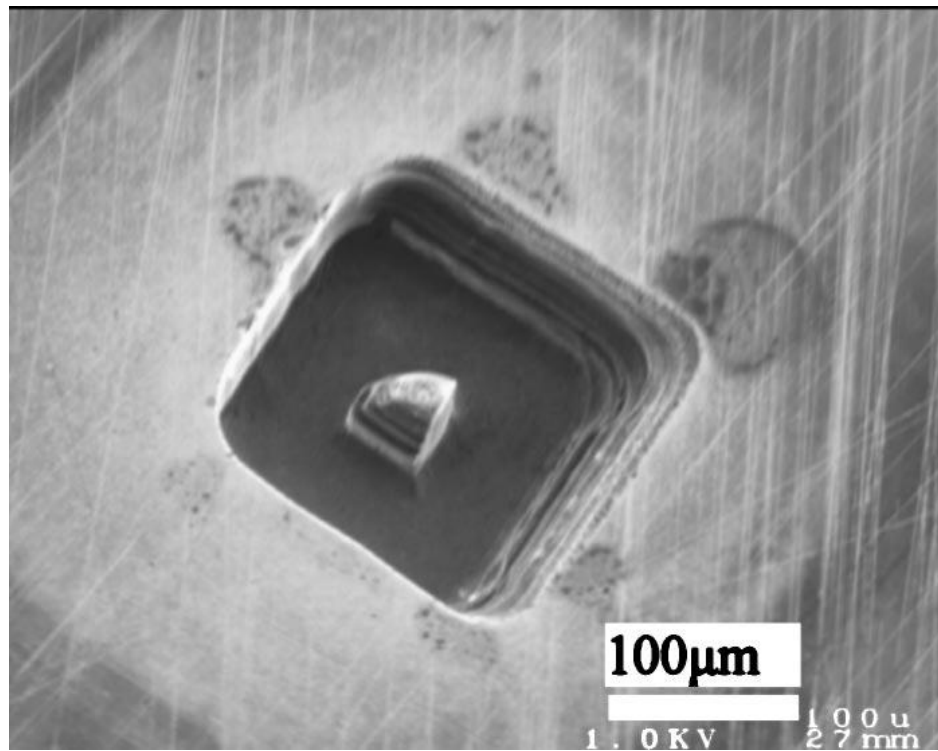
5: 3D machined feature using the " Uniform Tool Wear" method [11]
